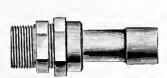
STRAIGHT BOILER COUPLING, FOR IRON PIPE.
